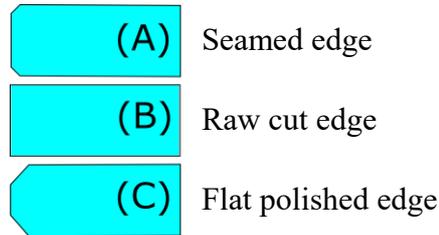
Edge machining used for NAW measurements and bending testing. (A) seamed edge (swiped) which is rough with defects but the edges are lightly sanded (used before heat strengthening), (B) untreated diamond cut edge, and (C) flat polished edge with matte surface.
